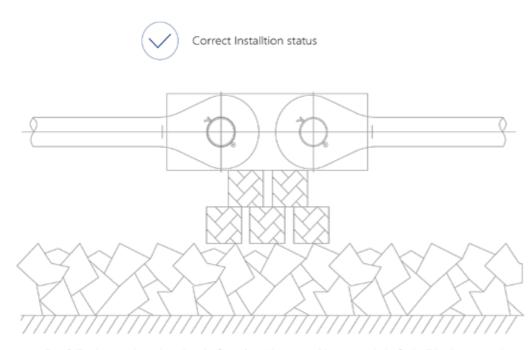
Timber is placed under shaft and unidirectional hinge, and shaft shall be horizontal
